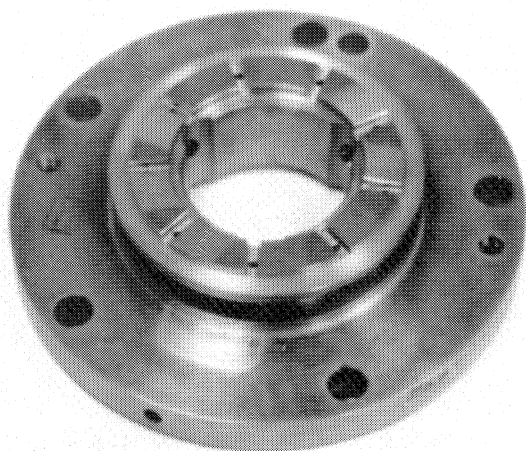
Photograph of Original Compressor-End Combination Tapered Land Thrust and Three-Lobe Journal Bearing.
